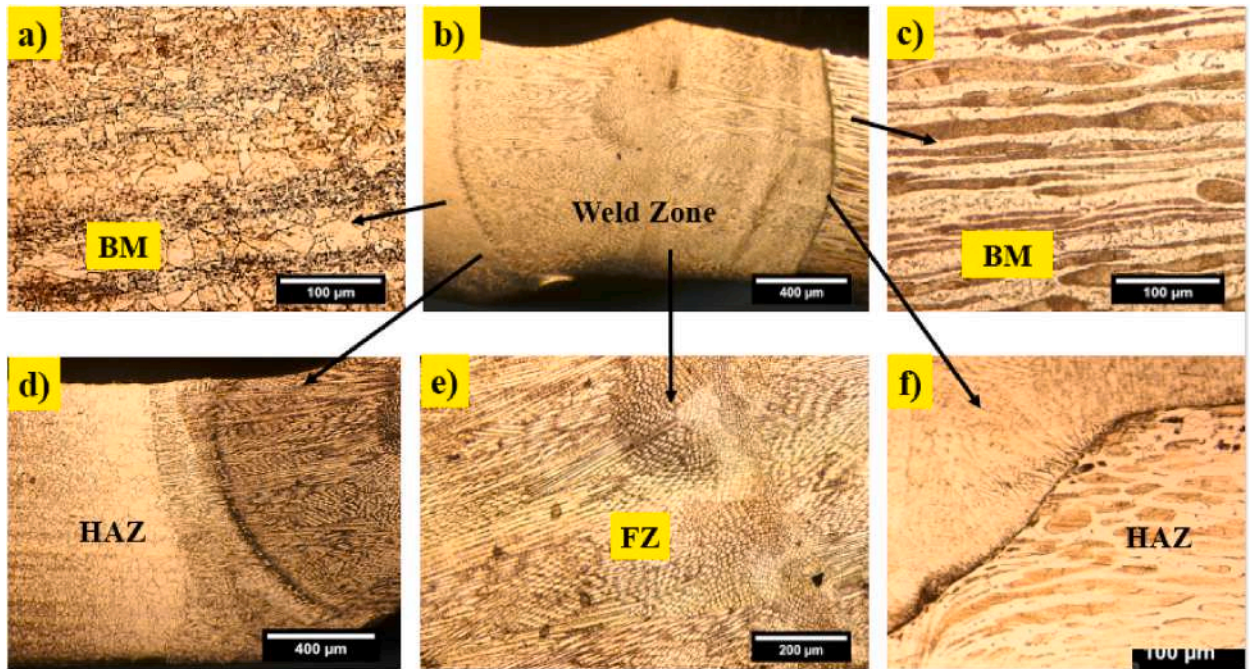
Microstructure of weld joint at laser power of 525 W, speed 300 mm/min, focal distance of -1.5 mm, a) Inconel 600 base metal, b) weld joint, c) duplex base metal, d) HAZ of Inconel 600, e) fusion zone, f) HAZ duplex.
